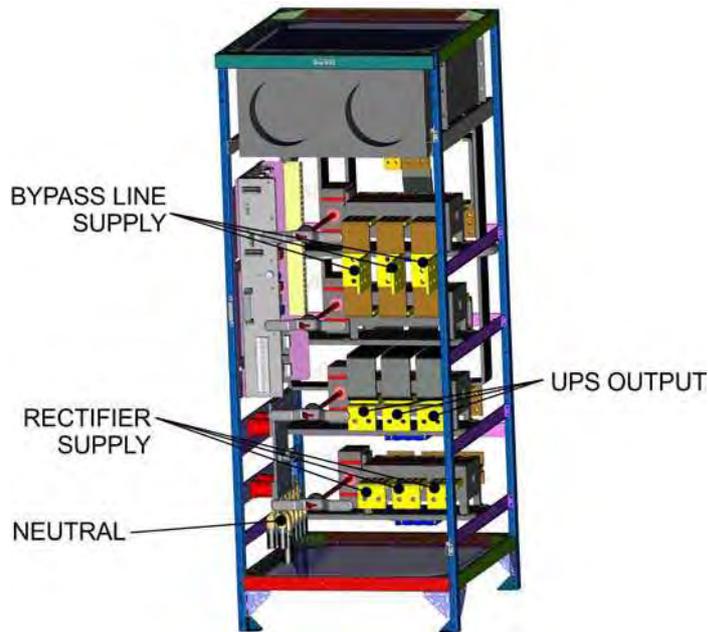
600-800kVA UPSaver, detail of the I/O module power terminals (bottom cables entry)
